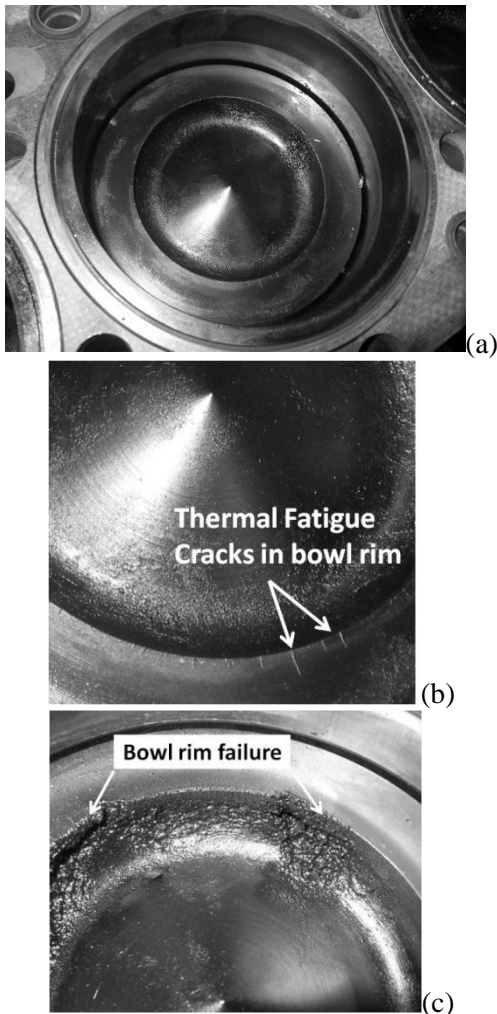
(a) Piston in bore; (b) cracks on inside edges of bowl rim; and (c) bowl rim failure.
